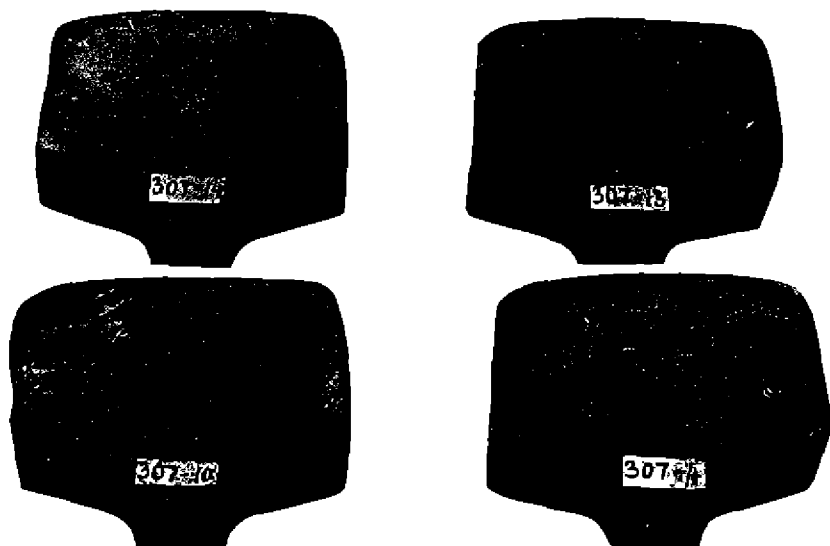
A type of shearing fracture in the head of a rail, illustrating its development at four places of its length.
